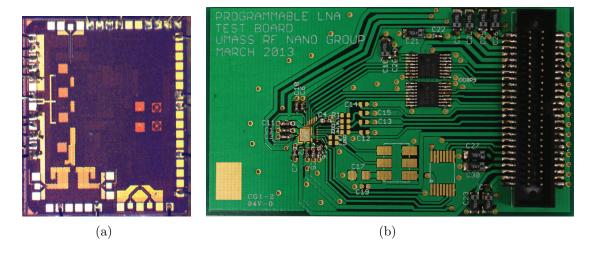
(a) The fabricated chip die photo. The dimensions of the chip are $2 \text{mm} \times 1.6 \text{mm}$. (b) Photograph of the PCB board with the die attached.
